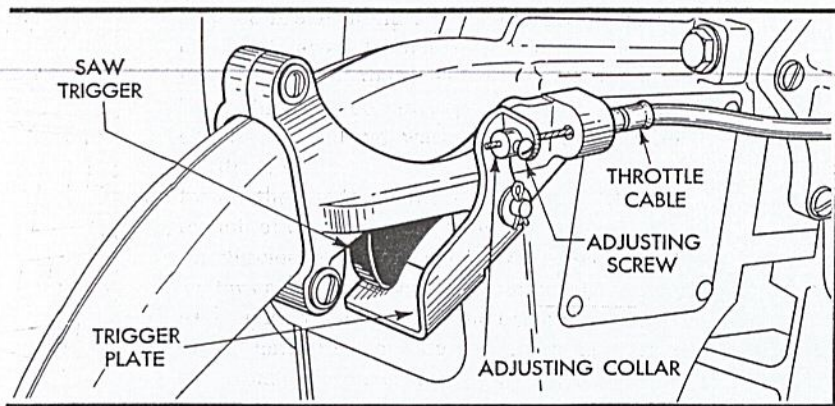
Assembling Throttle Support on Pistol Grip of Engine
